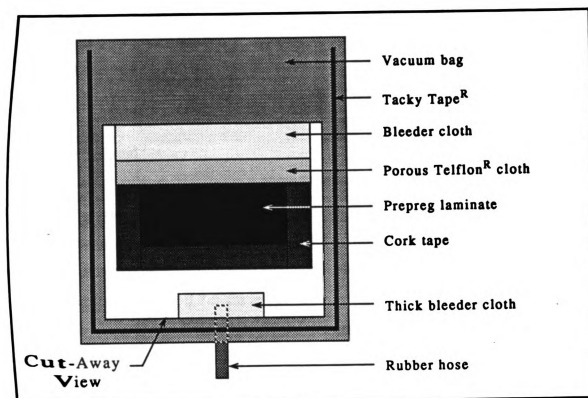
Cut-Away View of Stacked Prepreg Laminate.
